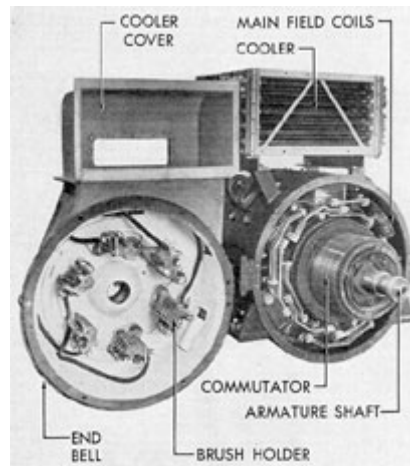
Front view of G.E. auxiliary generator, end shield and cooler cover removed.
